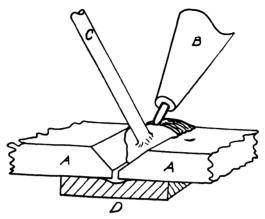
Welding cast aluminum: A. Cast aluminum, B. Torch, C. Aluminum filler rod, D. Back up material
